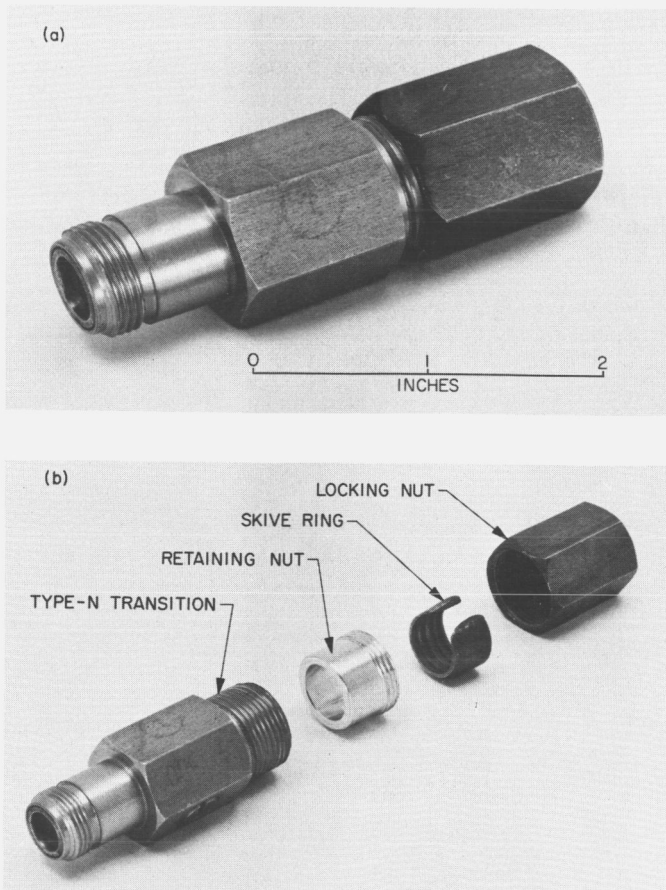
Typical semirigid coaxial cable connector, assembled and disassembled
